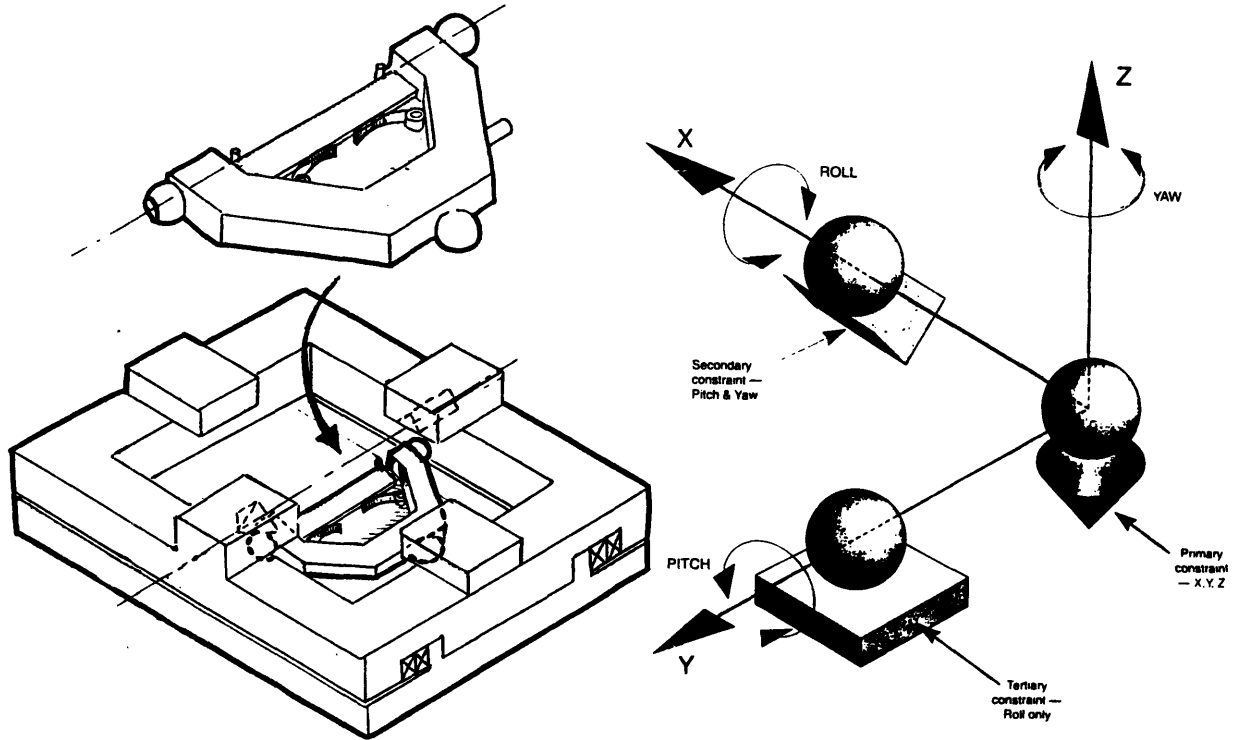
Flip stage design concept #2: kinematic mechanical fixture; initial design sketch (left), underlying kinematic concept (right, from [B19]).
